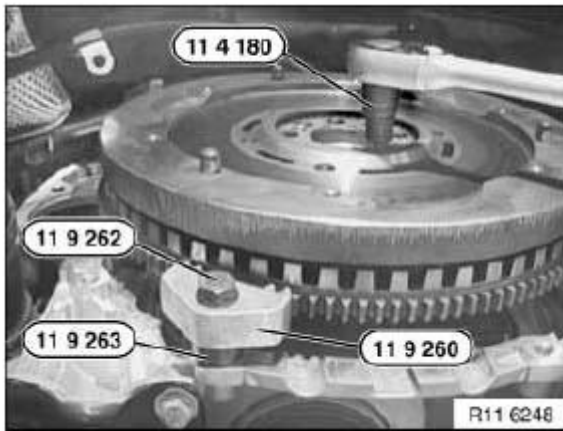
Identifying Special Tools For Flywheel (Manual Transmission)
